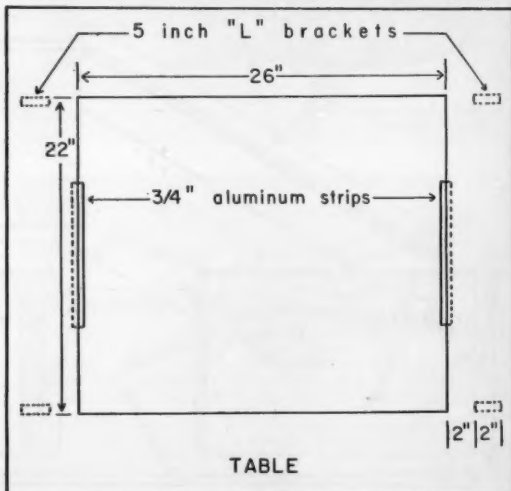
Drawing illustrating position of "L" brackets and aluminum strips.
